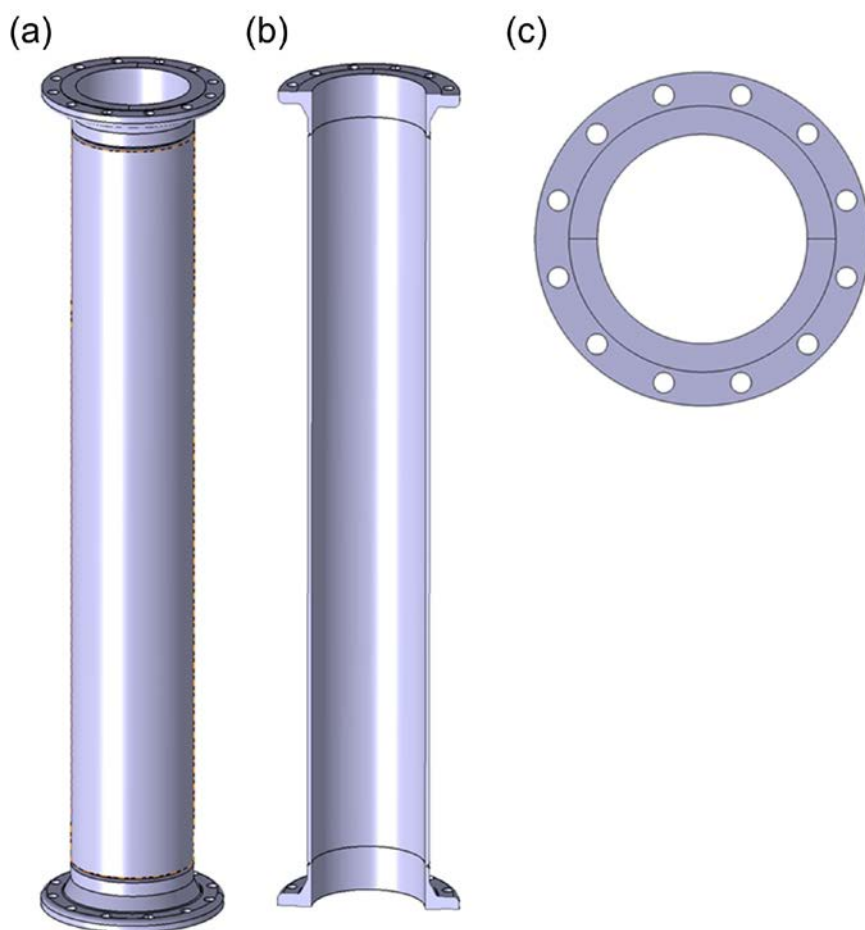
Three-dimensional model of PILLAR middle vessel in several viewpoints. (a) Isomeric view, (b) cross-sectional view in axial direction, and (c) top (bottom) view
